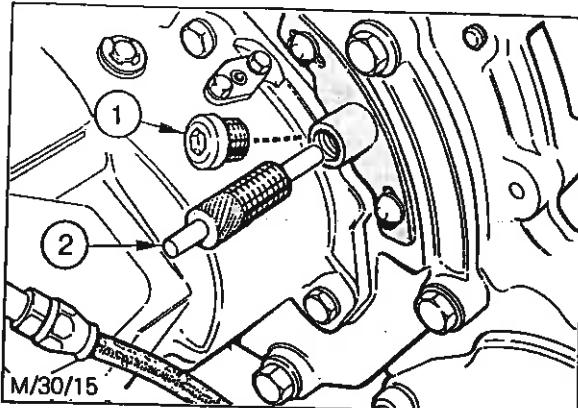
Injection Pump Timing - Automotive and G.P. Governed Pumps
